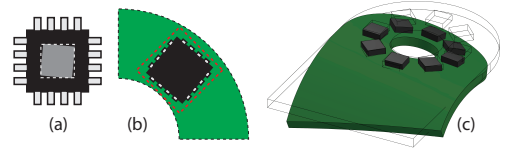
Different misalignment causes: chip packaging (a), PCB assembly (b), board deformation (c)
